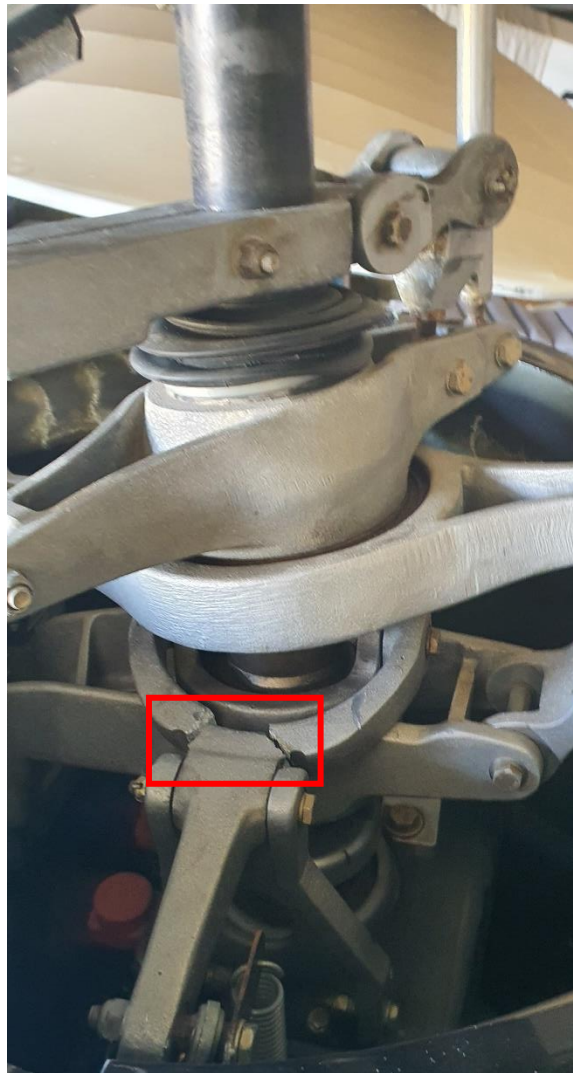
Red block shows fractured joint component of the main rotor hub's non-rotating swashplate.
